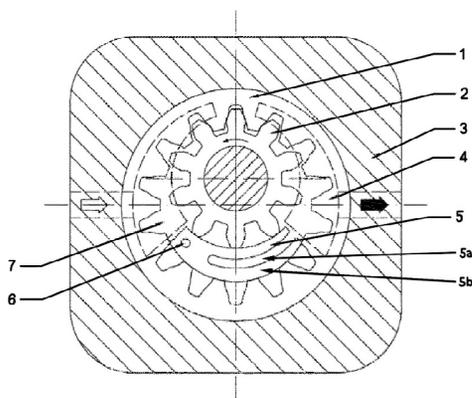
Cross-section of the pump with a modified sickle insert: 1 – toothed rim, 2 – gear wheel, 3 – pump body, 4 – discharge space, 5 – sickle insert, 5a – bay inside the sickle insert, 5b – elastic tongue of the sickle insert, 6 – locating pin, 7 – suction space (Towarnicki et al., 2021)
